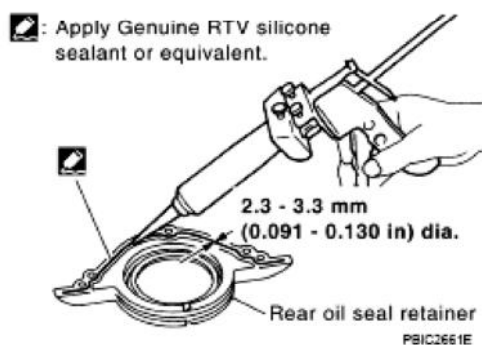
Applying Bead Of Liquid Gasket With Tube Presser To Rear Oil Seal Retainer
